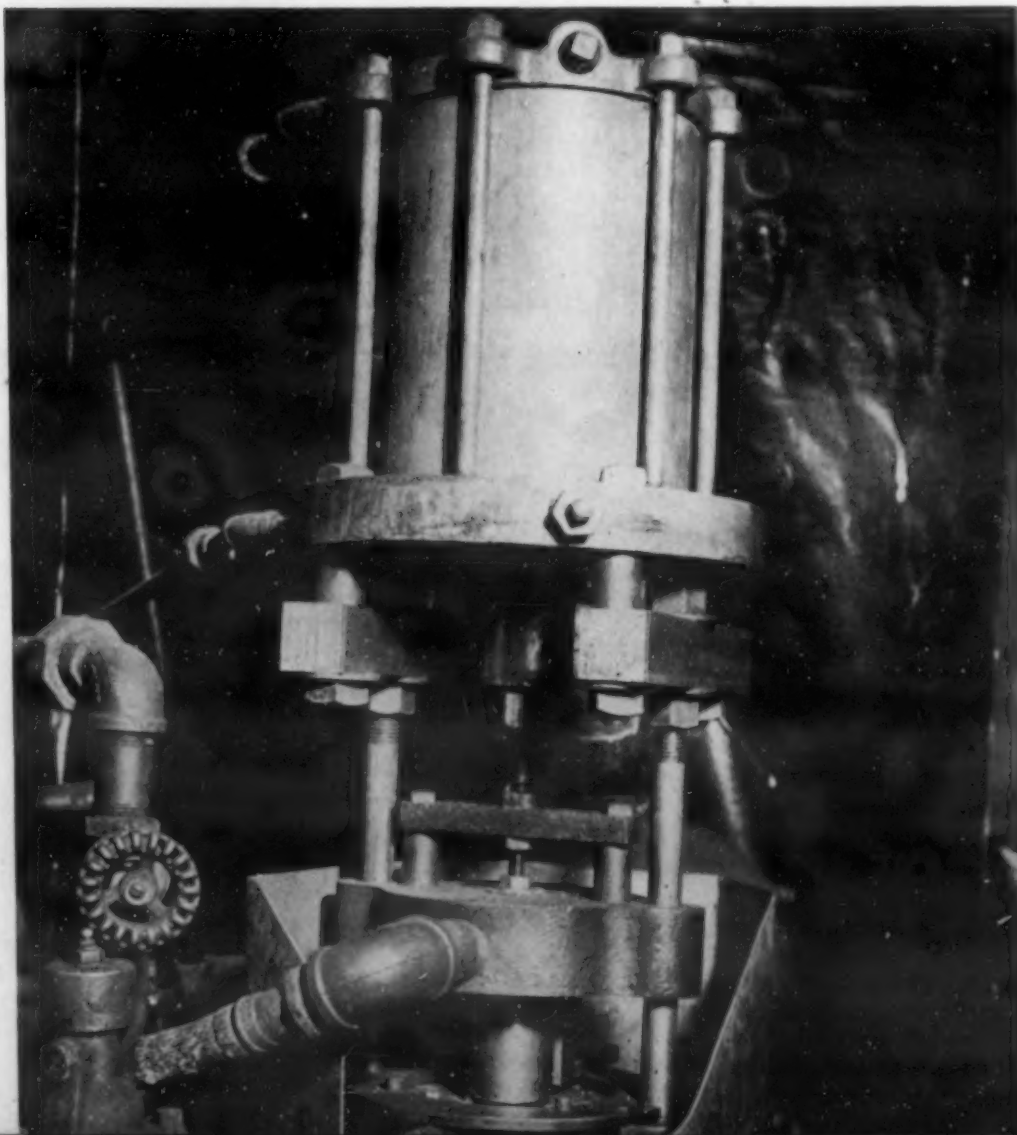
A closeup of the quenching fixture as the air cylinder grips the hot die firmly for the quench.
